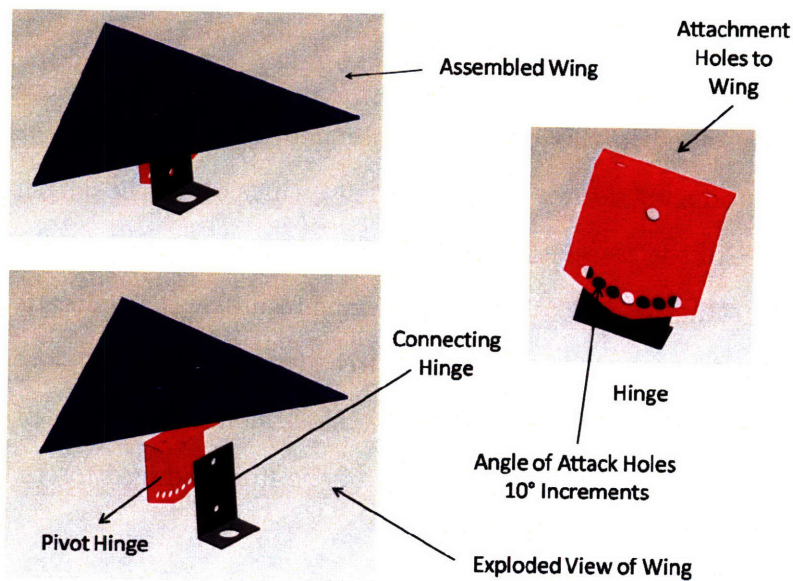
Drawings of the delta wings assembly. The assembly consists of the wing, pivot hinge and connecting hinge. The wing is connected by means of the pivoting hinge which allows for change in its angle of attack.
